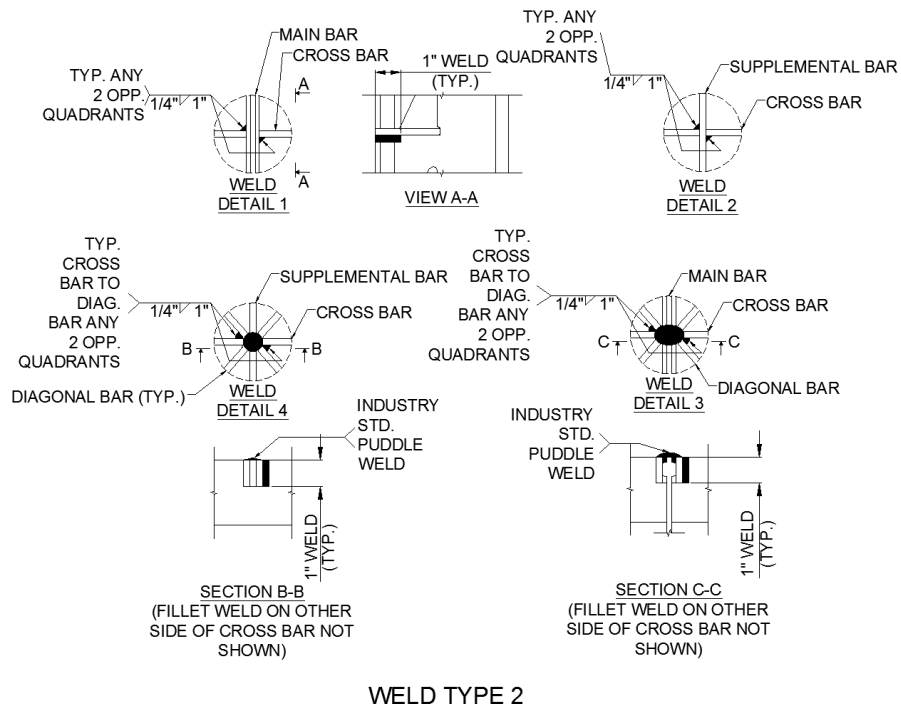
Type 2 weld detail (original detail provided by the BGFMA)
